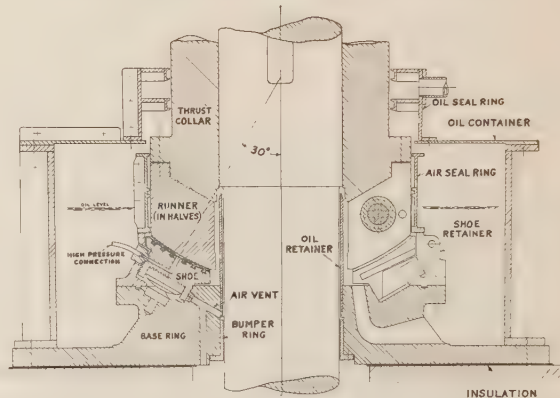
CROSS-SECTION OF KINGSBURY SPHERICAL BEARING
